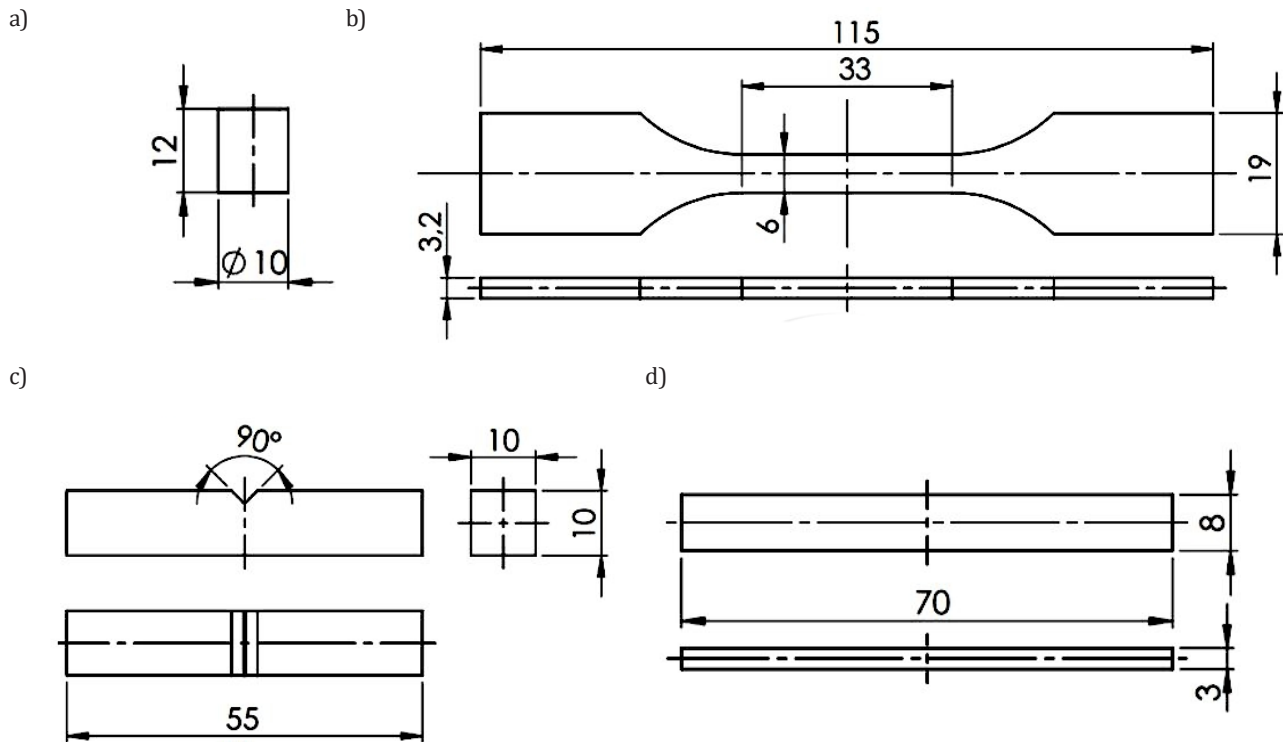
Drawings of the test samples (all dimensions in millimeters)
